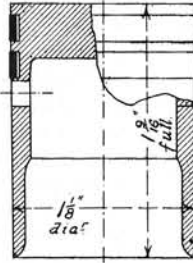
FULL-SIZE DETAIL OF PISTON.
